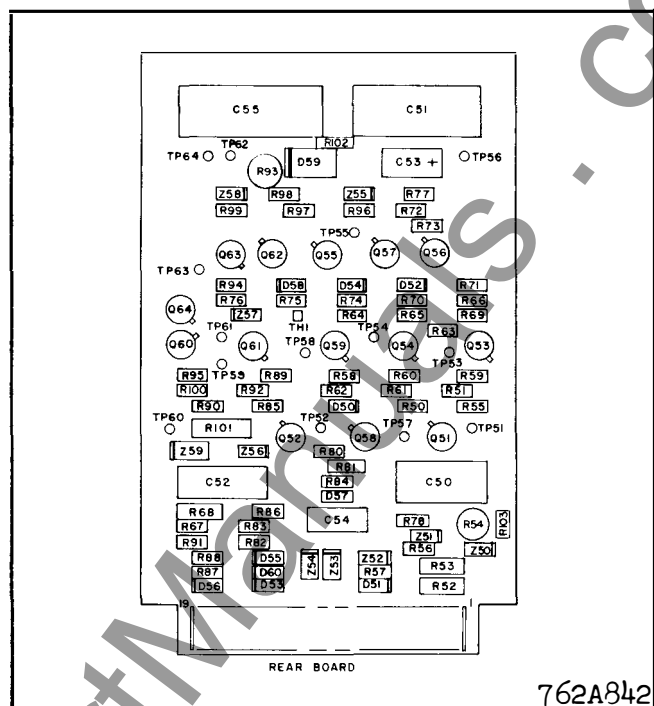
Component Location for the Rear Printed Circuit Board of the Type SKA Relay.
